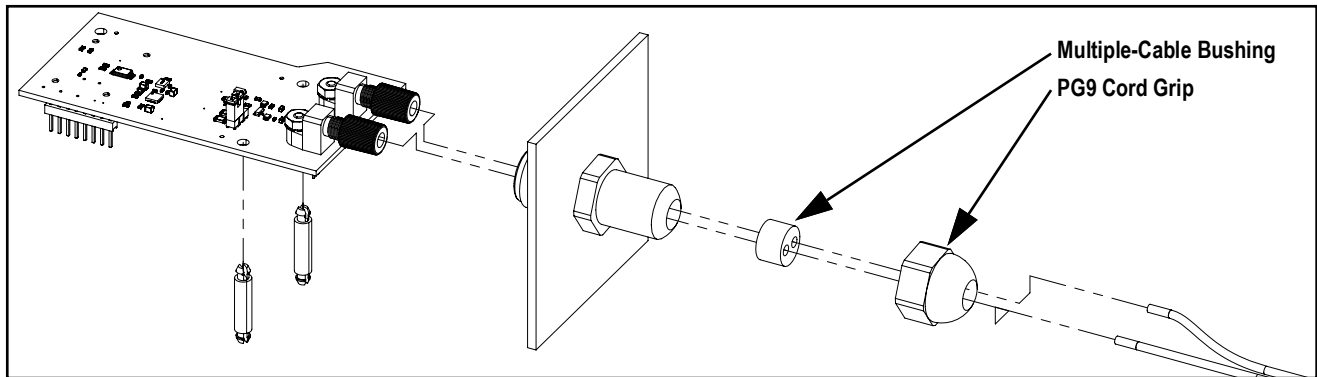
Fiber-Optic Cables through Cord Grip and Bushing
